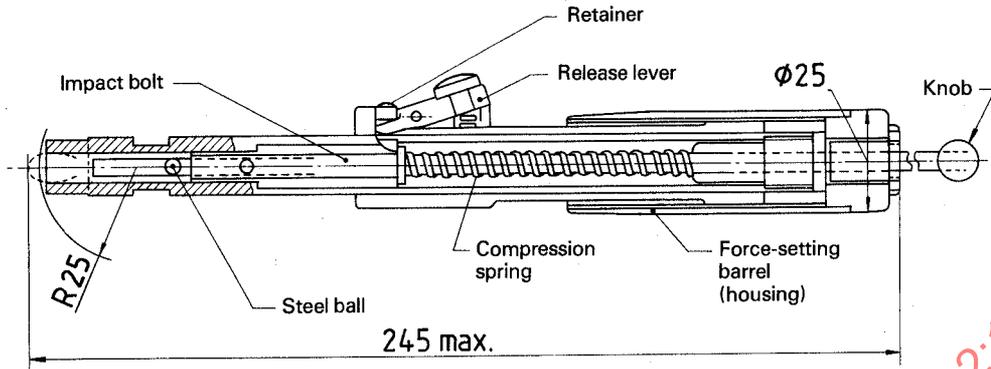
Impact tester (shown with spring compressed) (see 11.3.1)
